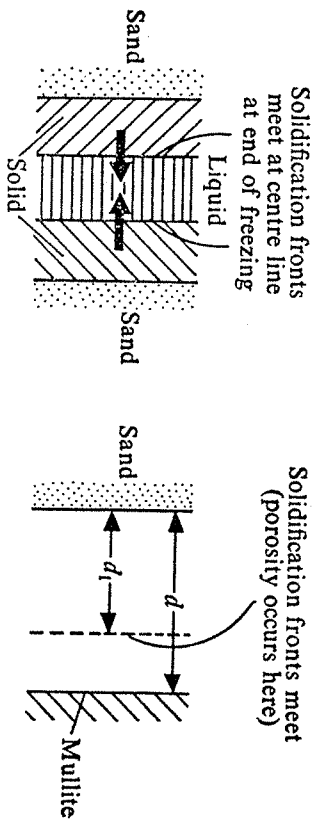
Solidification front in symmetrical and composite moulds.
